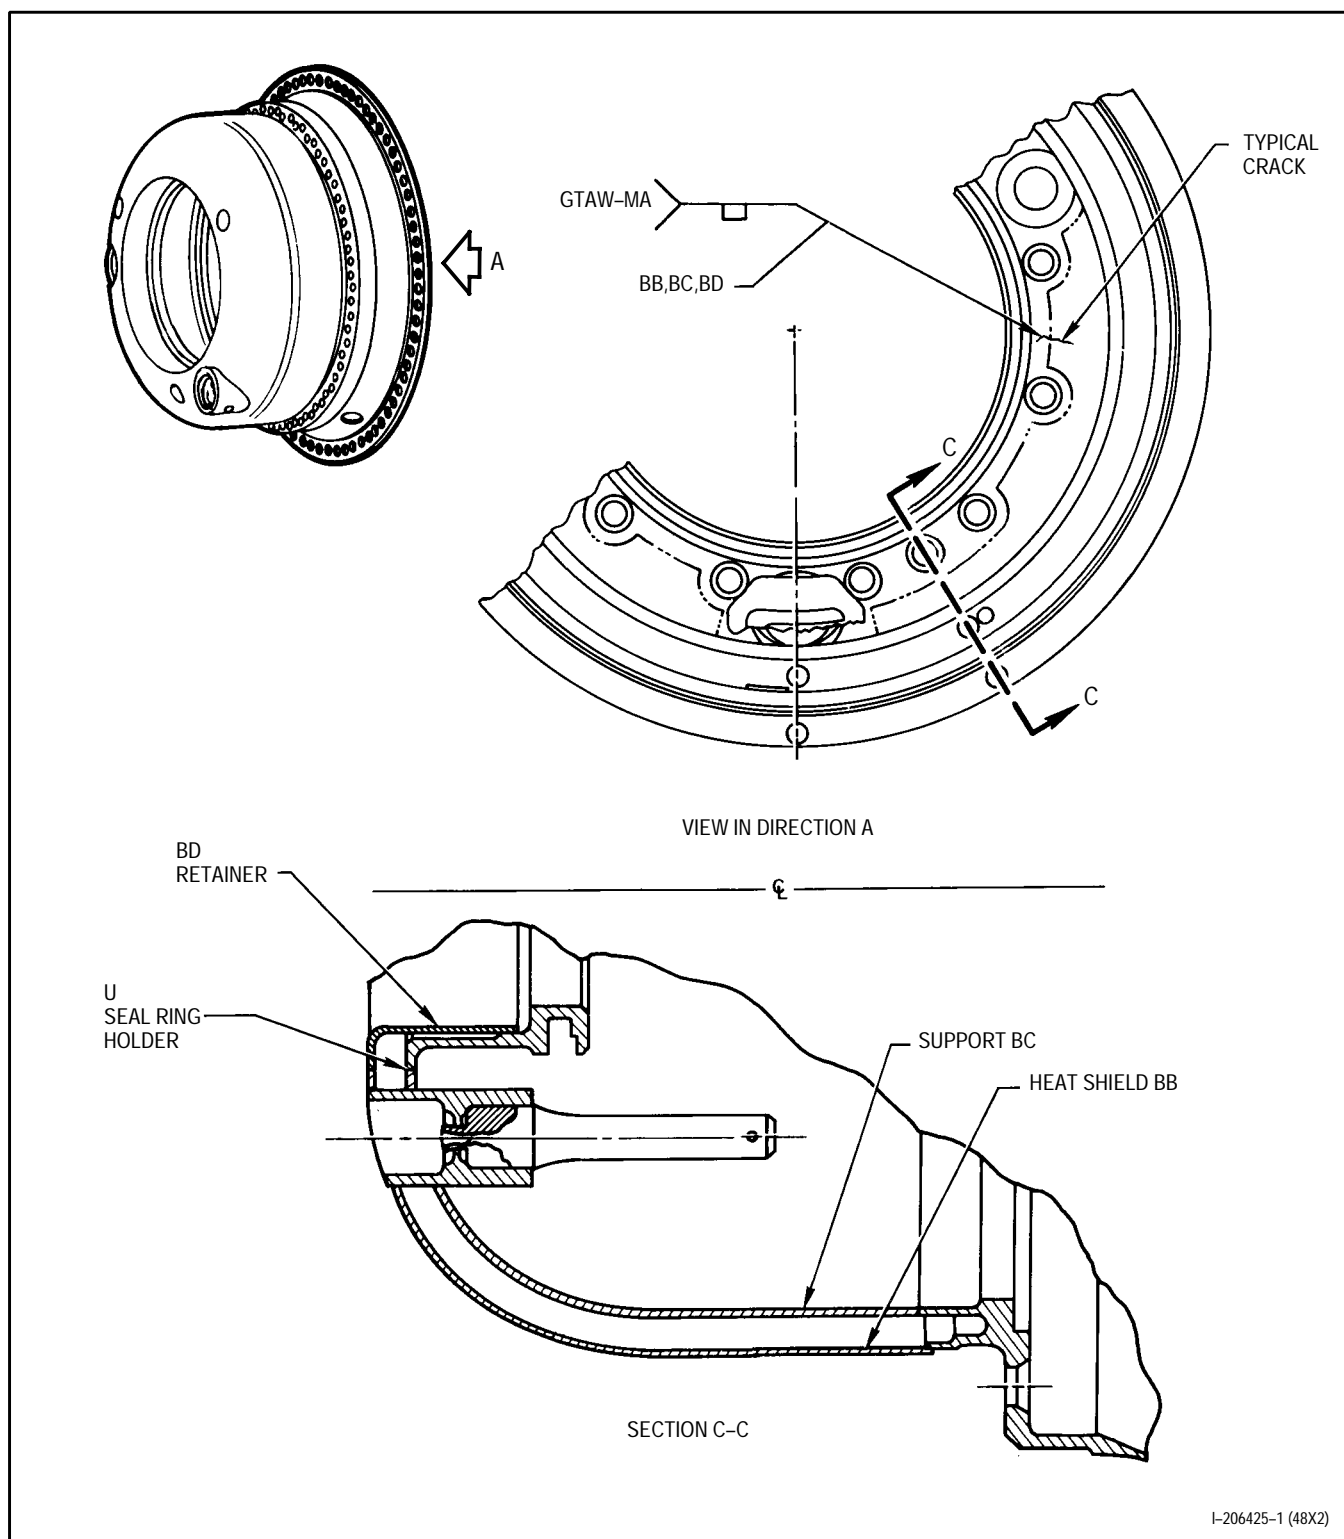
No. 4 Bearing Front Seal Support Assembly - Weld Repair of Nicks, Cracks, Scratches, and Gouges
